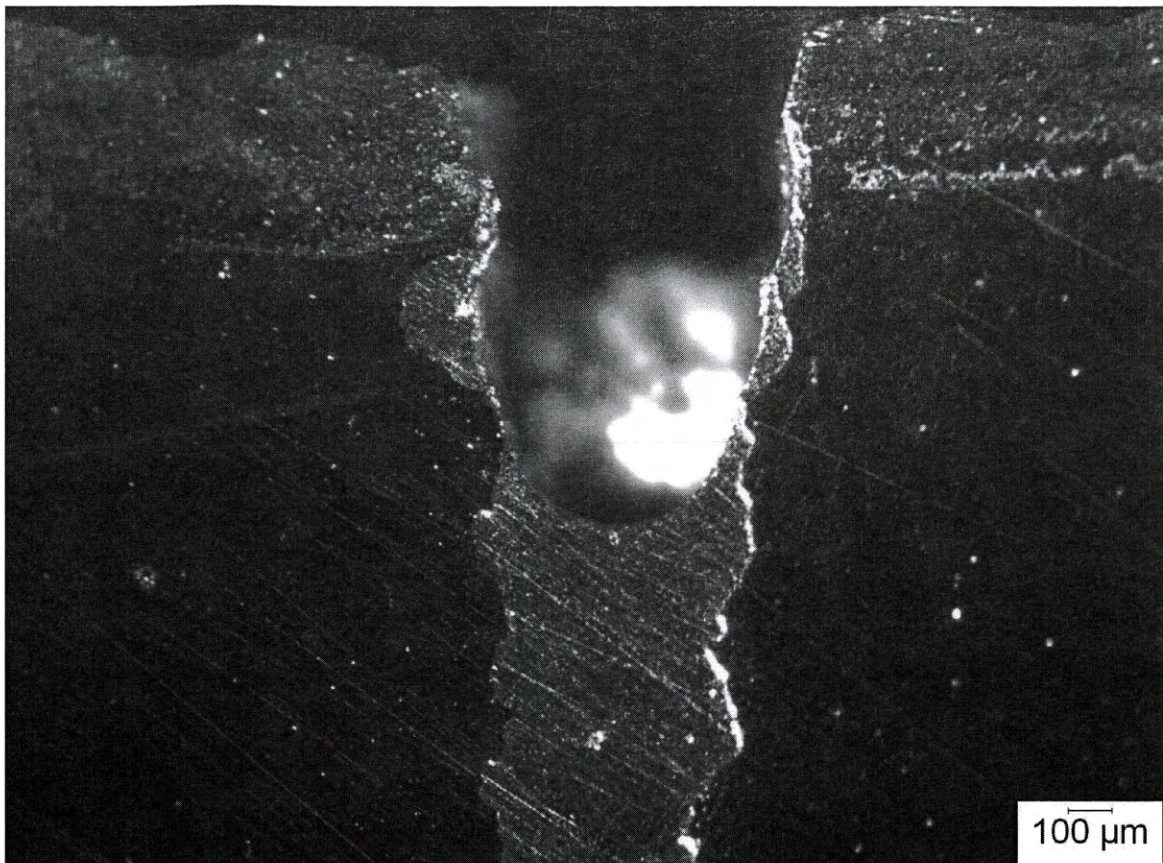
Stereo optical image of brazed crack mouth. Filler metal layer is evident along crack edge illustrating the existence of filling and subsequent partial emptying of the crack.
